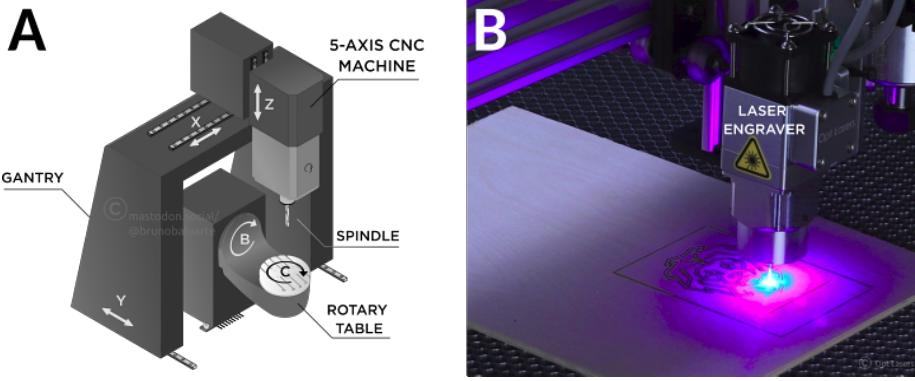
Axis CNC Machine. The CNC head contains a spindle that rotates the end-mill. B – Instead of a spindle, a laser head can be used to machine e.g. a board as shown in the photograph (Opt Lasers)
